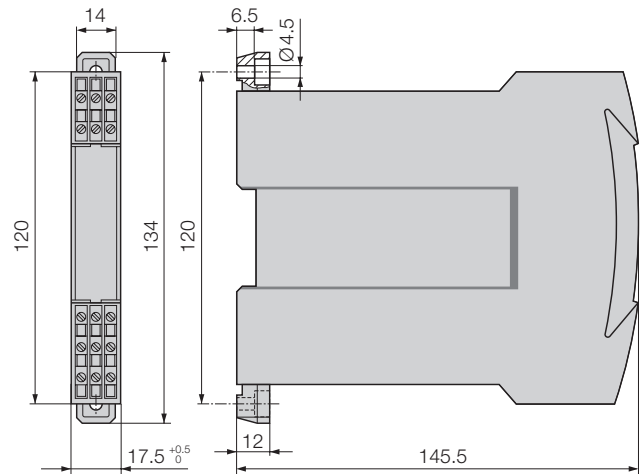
SINEAX TV 808 in housing S17, screw hole mounting brackets pulled out.
